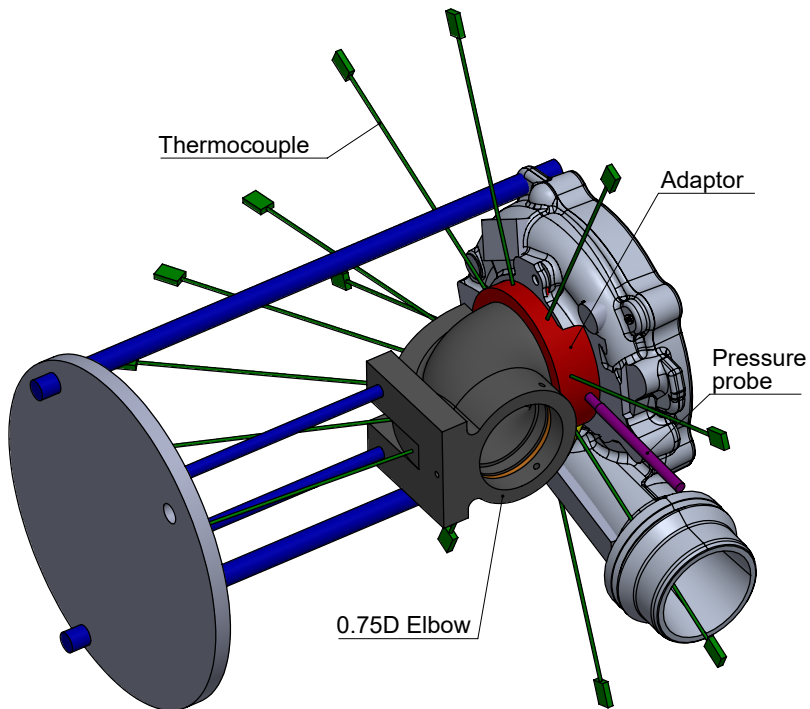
CAD model of the compressor assembly featuring the 0.75D elbow inlet attached to the common adaptor, including the pressure and temperature instrumentation and the mounting system.
